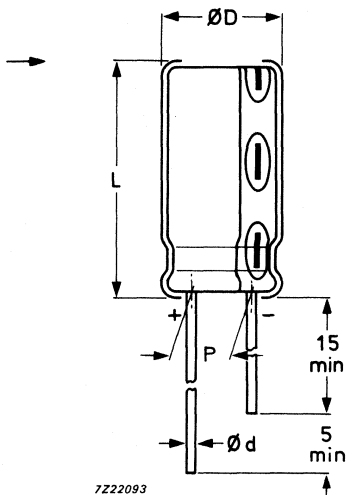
Style 1; see Table 3 for dimensions ϕd , ϕD , L and P.
